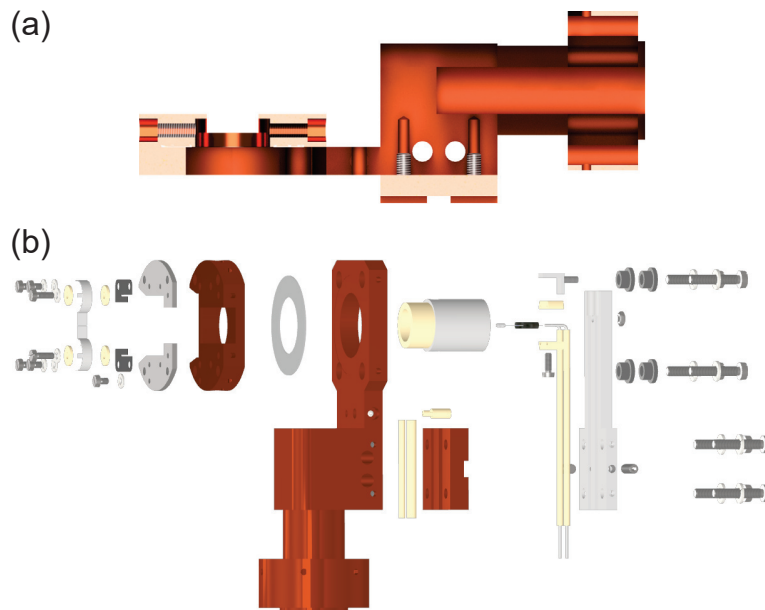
(a) Cross-sectional view of the redesigned manipulator head for the preparation chamber. The thickness of the inner walls is increased compared with the previous design. (b) Exploded view of the assembled manipulator head for the preparation chamber.
